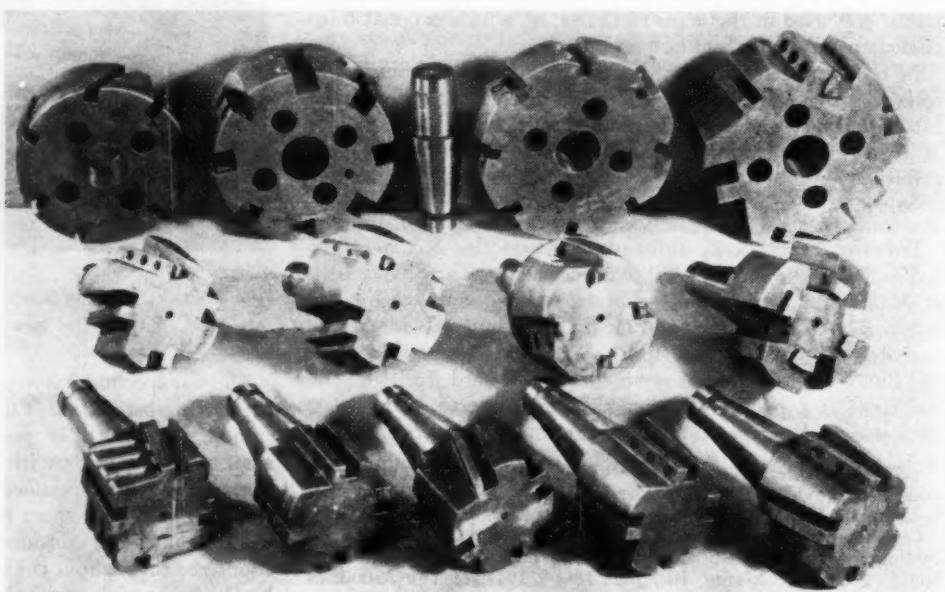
FLY-TOOL AND MULTIPLE-TOOTH CUTTER BODIES USED IN TESTS
